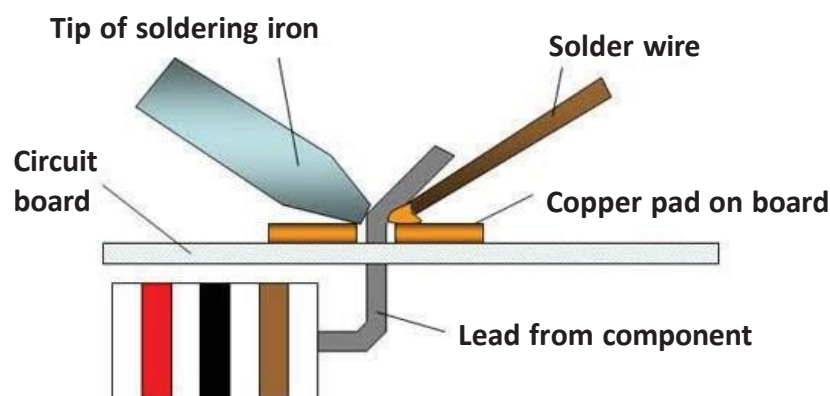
The tip of the soldering iron heats both the copper pad and the lead from the electronic component
